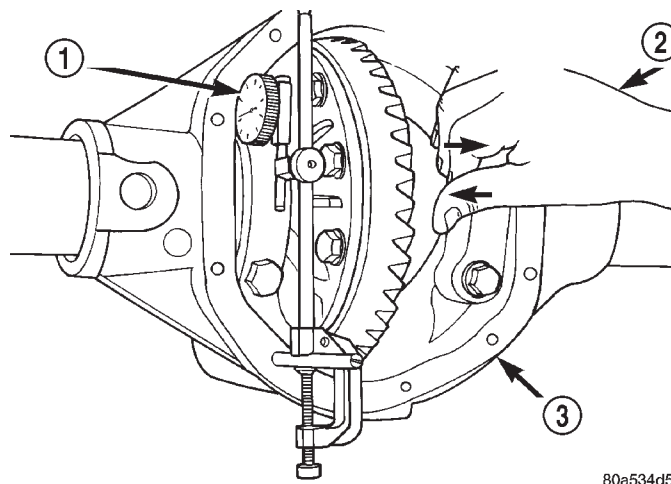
DIFFERENTIAL TO RING GEAR SIDE
